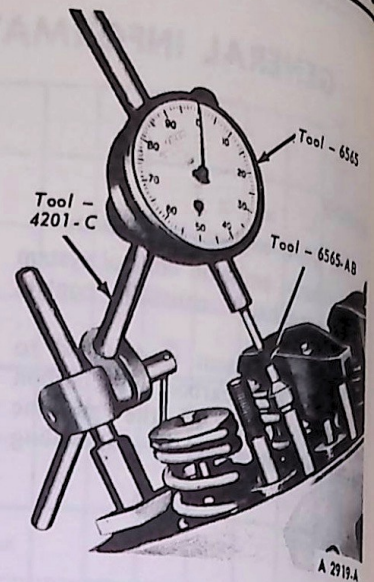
Typical Camshaft Lobe Lift—240 and 300 Six Engines
